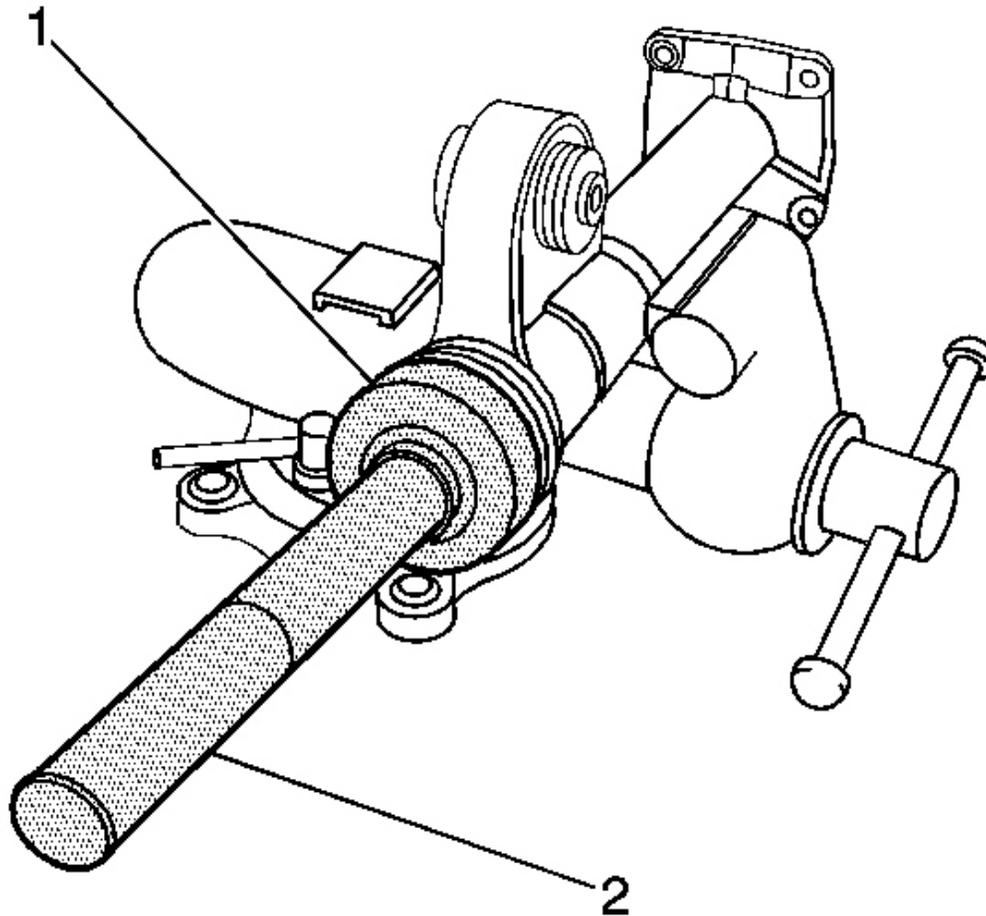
Installing New Axle Shaft Seal Using J 45225 & J8092
